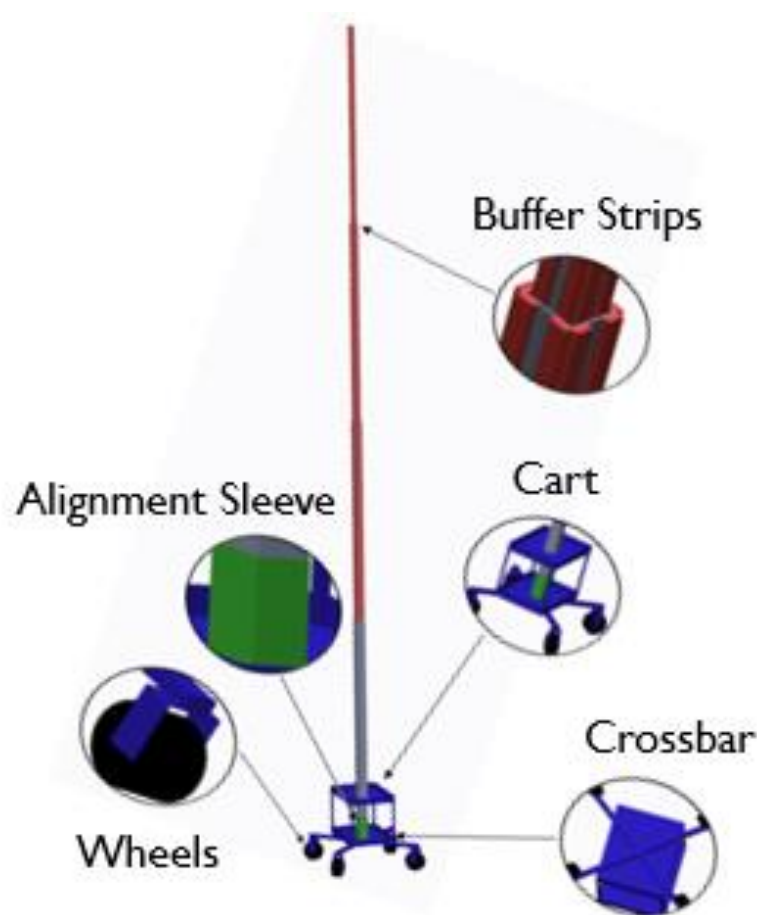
Assembled view of mechanism with zoomed view of individual parts
